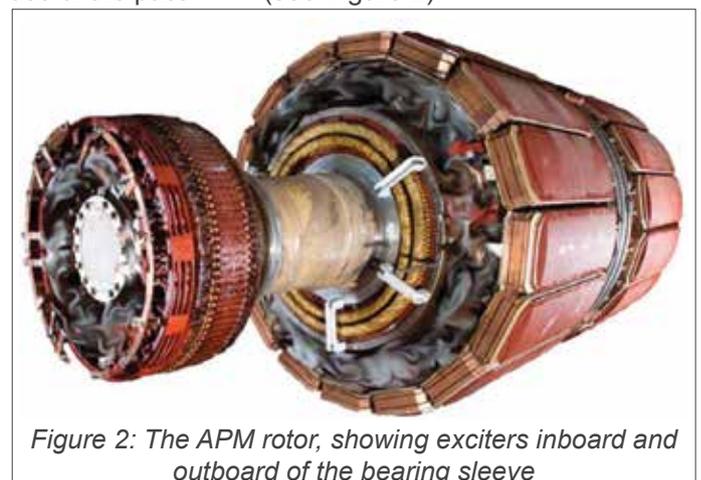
The APM rotor, showing exciters inboard and outboard of the bearing sleeve
